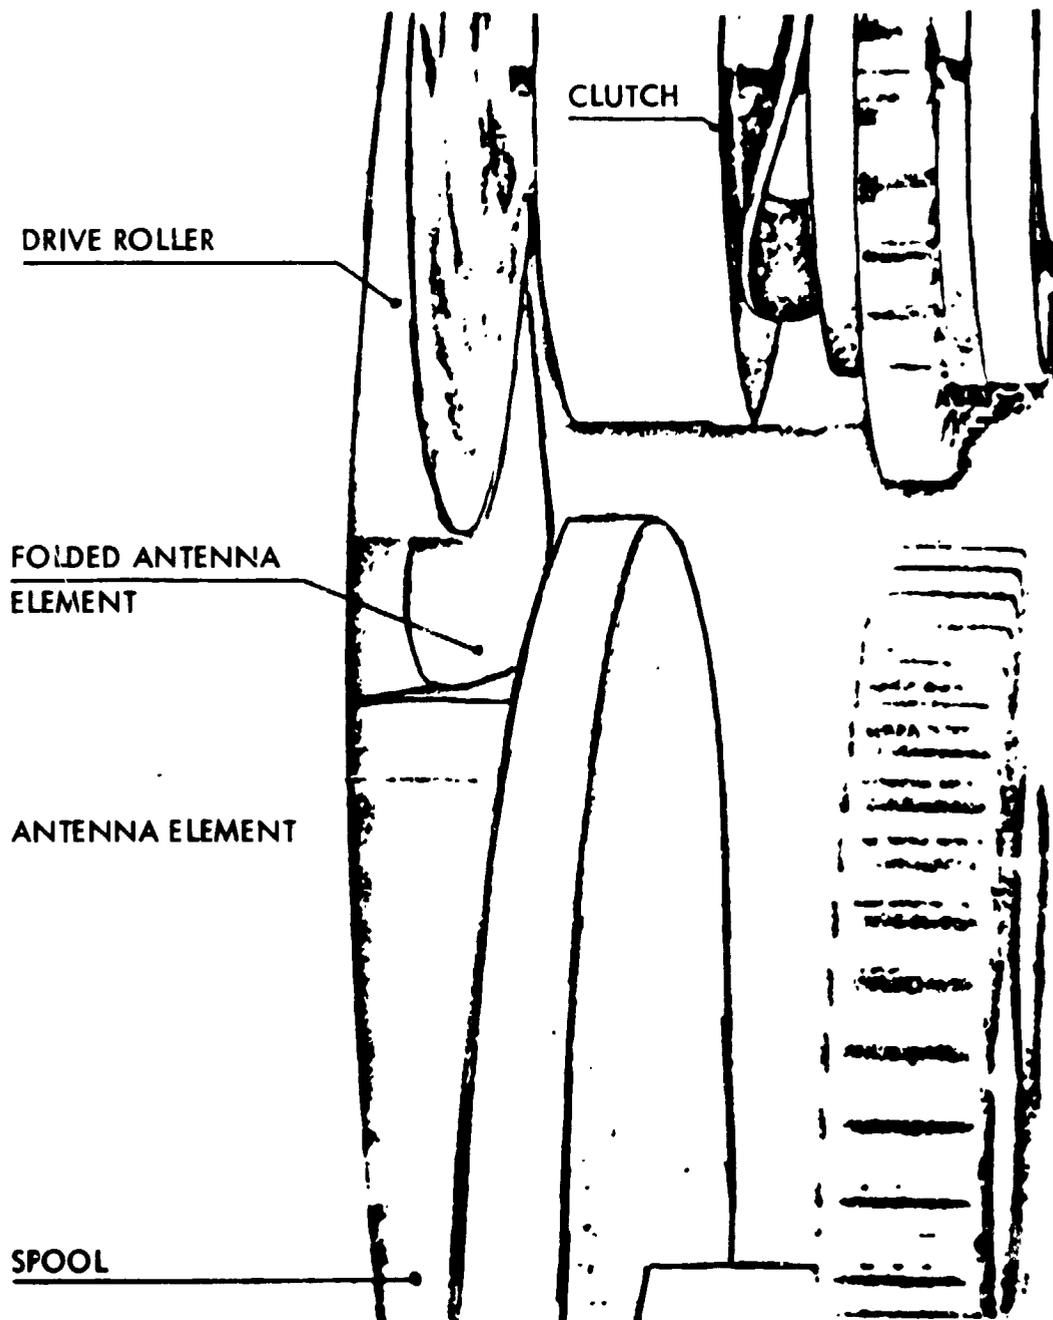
Close-up view of the failed mechanism after test step 1.2
